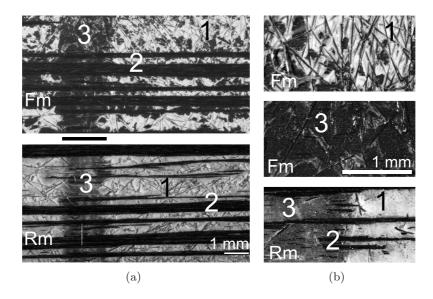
Fracture surface of both sides of FM 73 C-c specimen, flexible member (Fm) and rigid member (Rm) (a) close to an adhesive failure "stripe" and (b) zoom on both sides: 1 – cohesive failure, 2 – intralaminar failure of the composite and 3 – adhesive failure.
